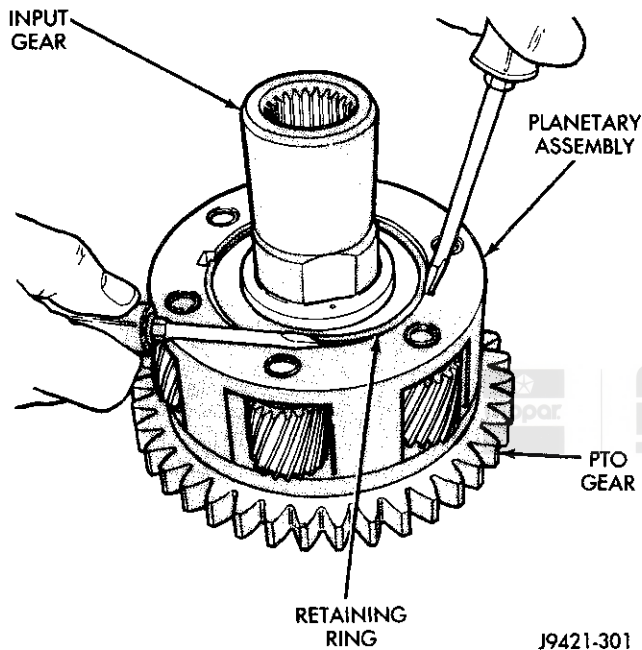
Removing Lock Ring/Input Gear Retaining Ring
